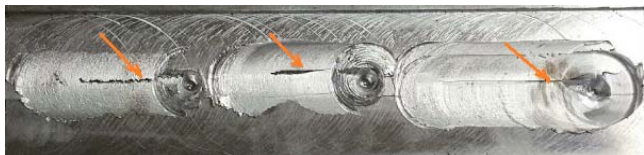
Open tunnels (red arrow) and a rough weld front surface.
